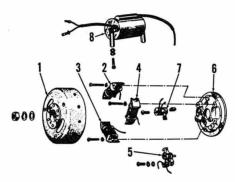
Exploded view of the ignition and electrical system flywheel assembly.
